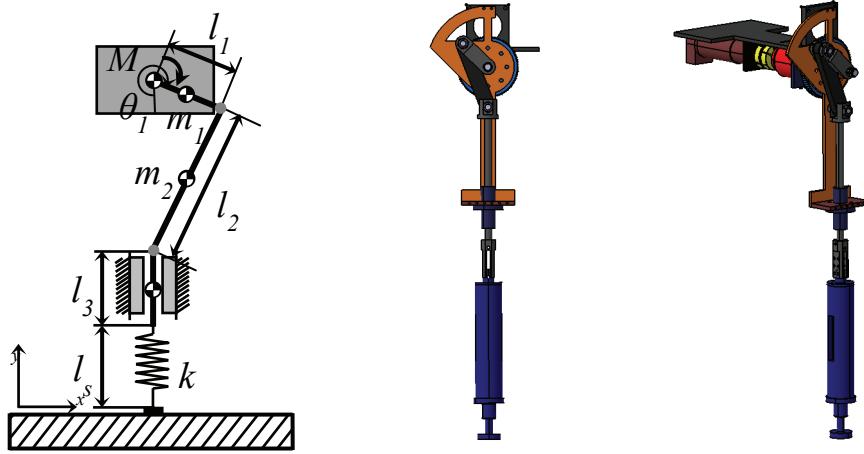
Hopping leg design using crank-slider mechanism. The dimensions of the prototype are
